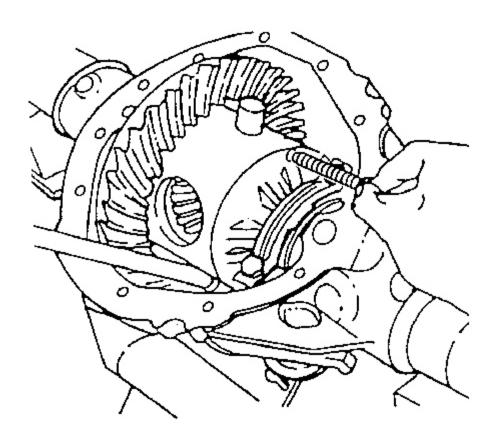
View Of Pinion Shaft Locking Bolt Courtesy of GENERAL MOTORS CORP.
